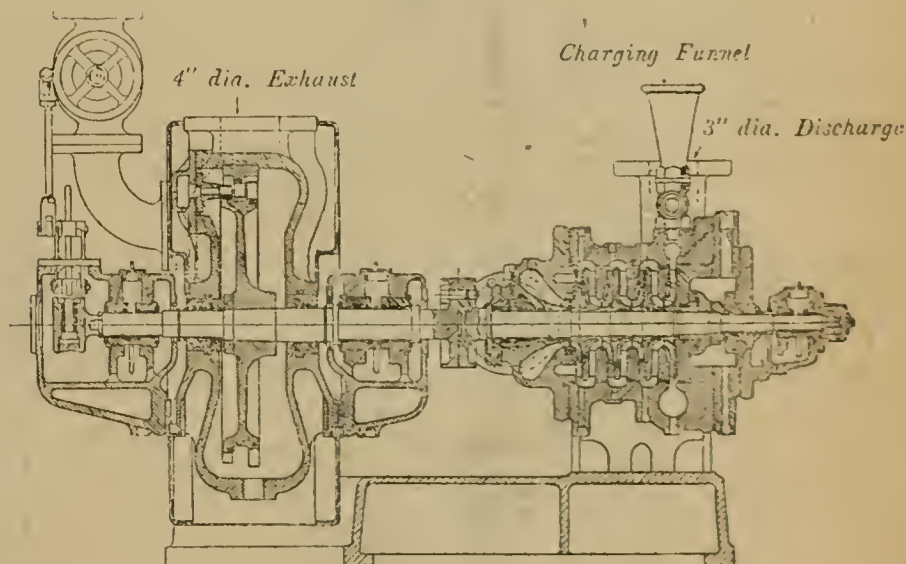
TURBINE-DRIVEN BOILER FEED PUMPS.
